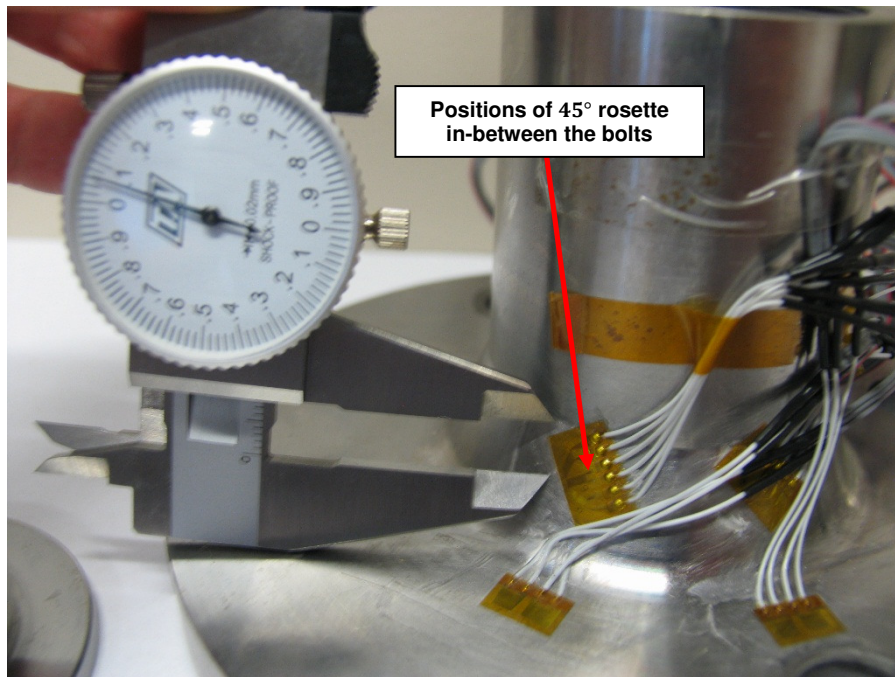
Photograph of the position of the 45° rosette in-between the bolts on the hub of the raised face flange with an O-ring groove
